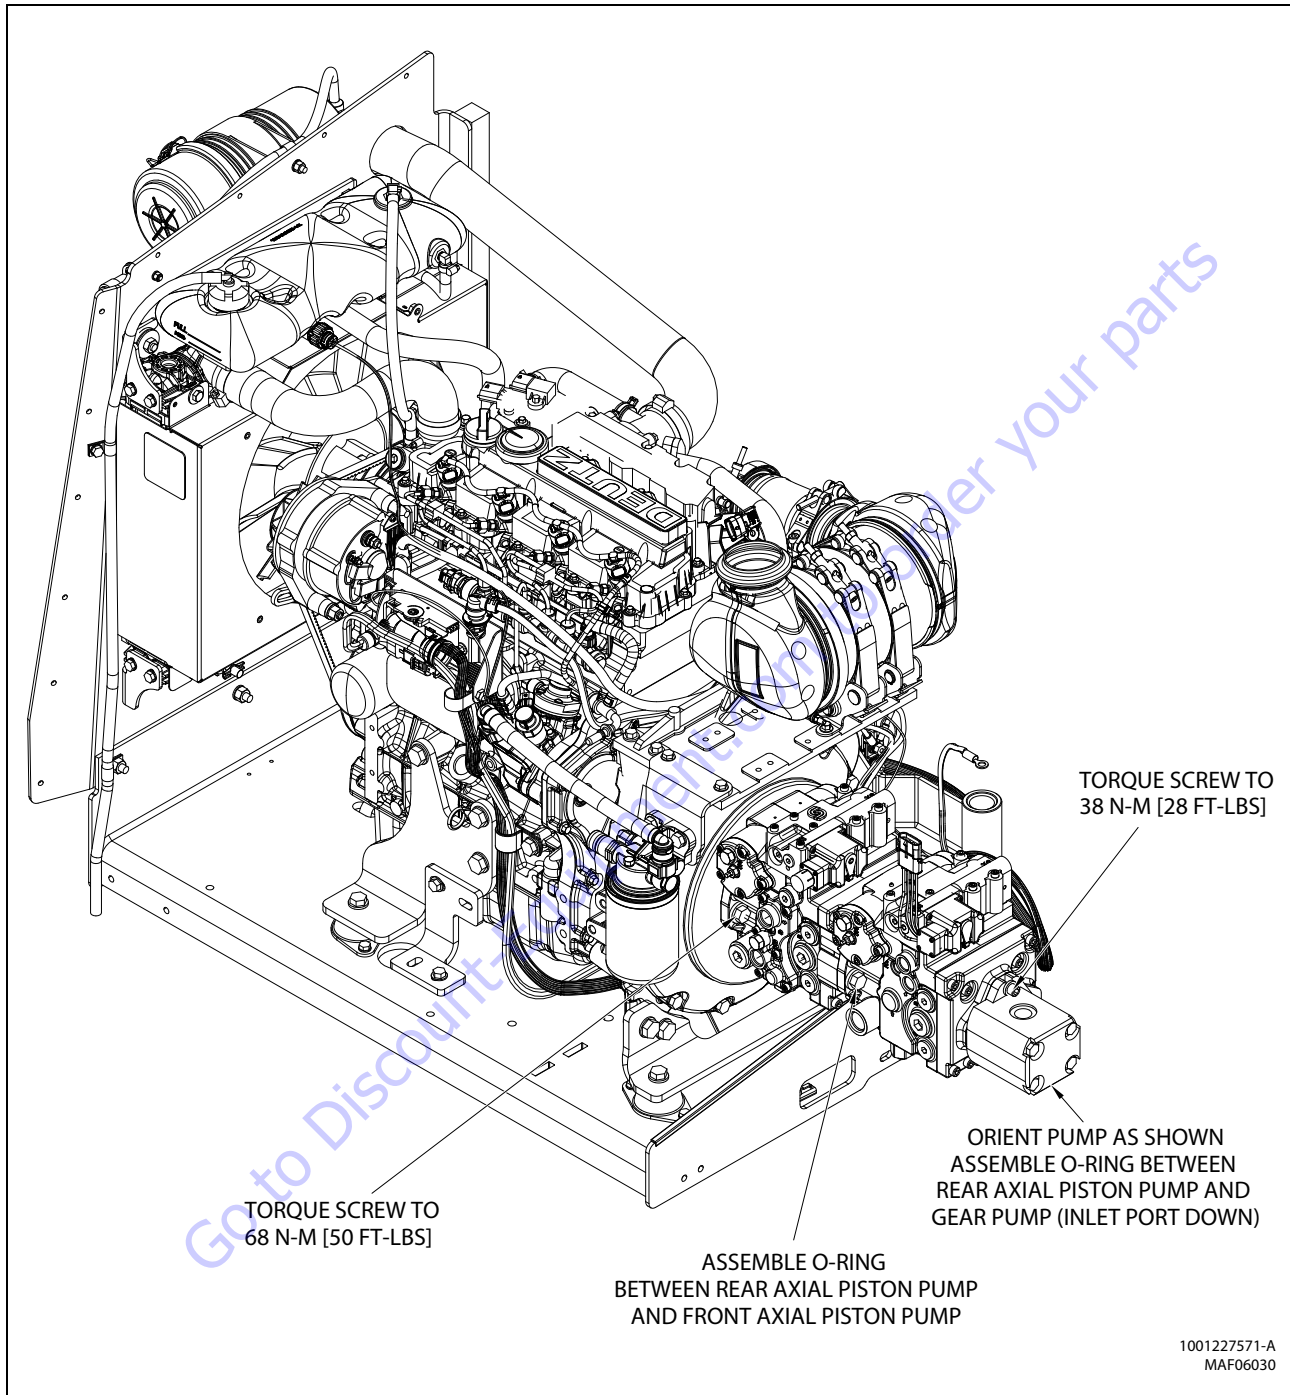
Deutz Engine (D2.9L4) - T4F (Sheet 4 of 4)
